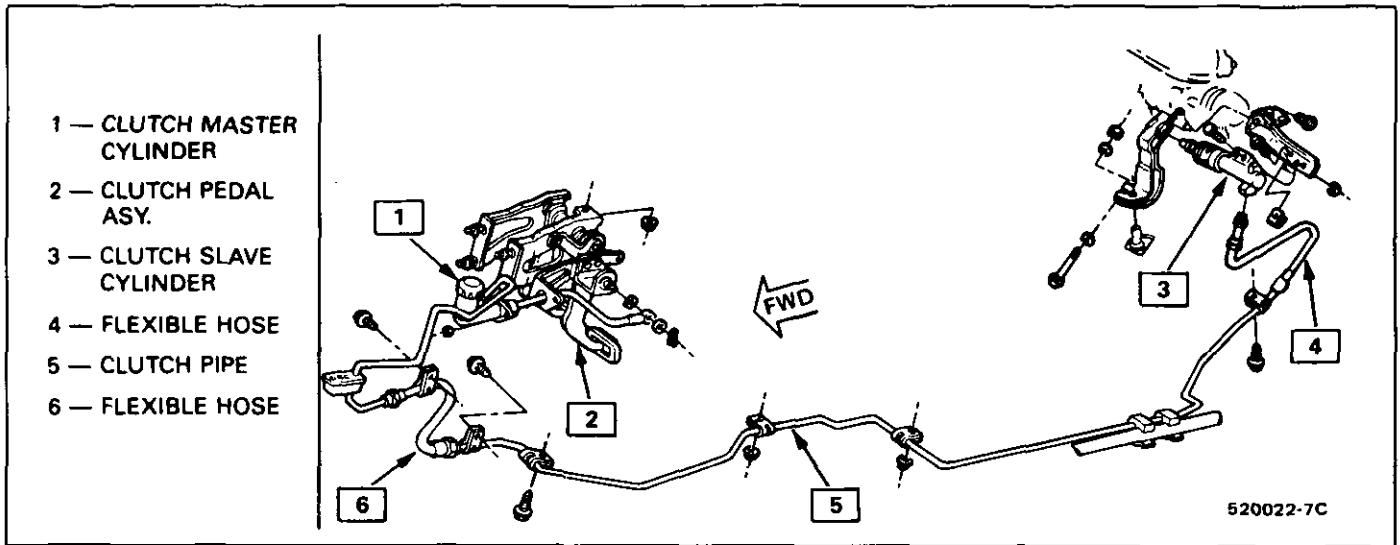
C-4 Hydraulic Clutch, Pipe Routing
